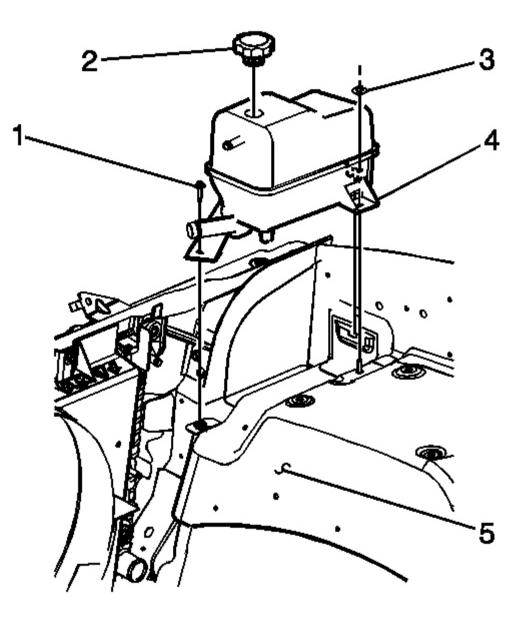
Identifying Surge Tank Courtesy of GENERAL MOTORS CORP.
